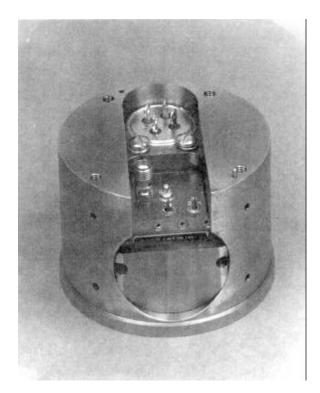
HOLDING FIXTURE FOR TRANSMITTER AND THERMAL BATTERY
